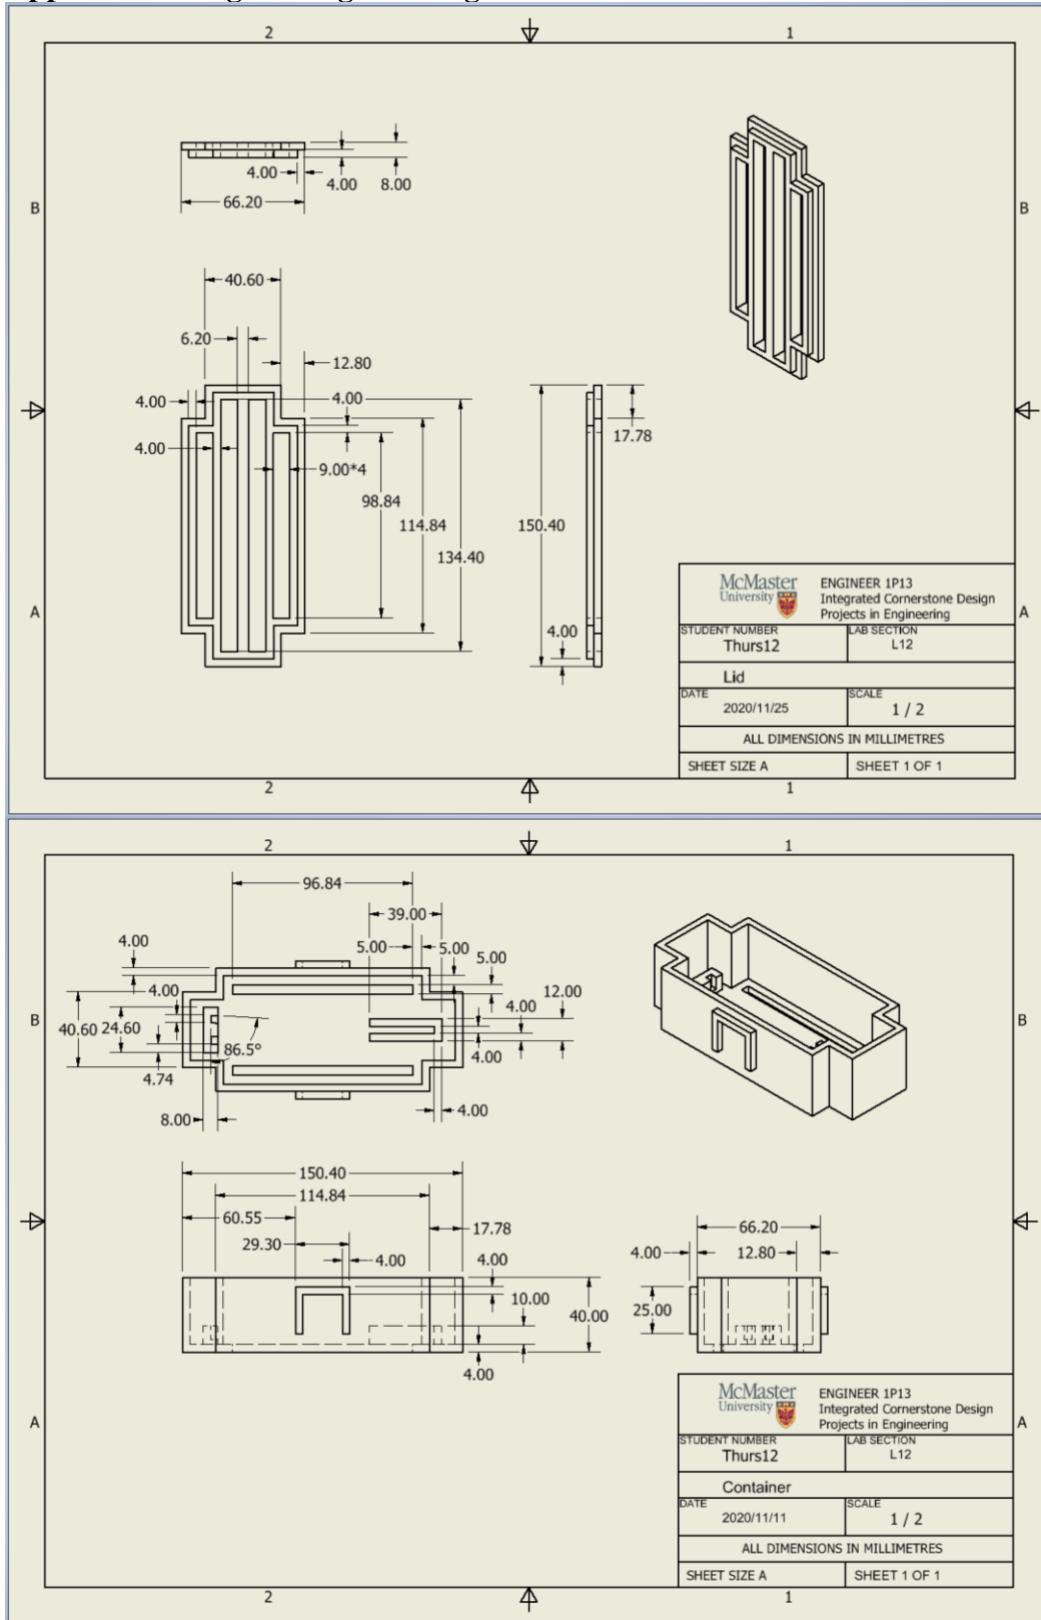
Fully dimensioned engineering drawings of the container and lid
